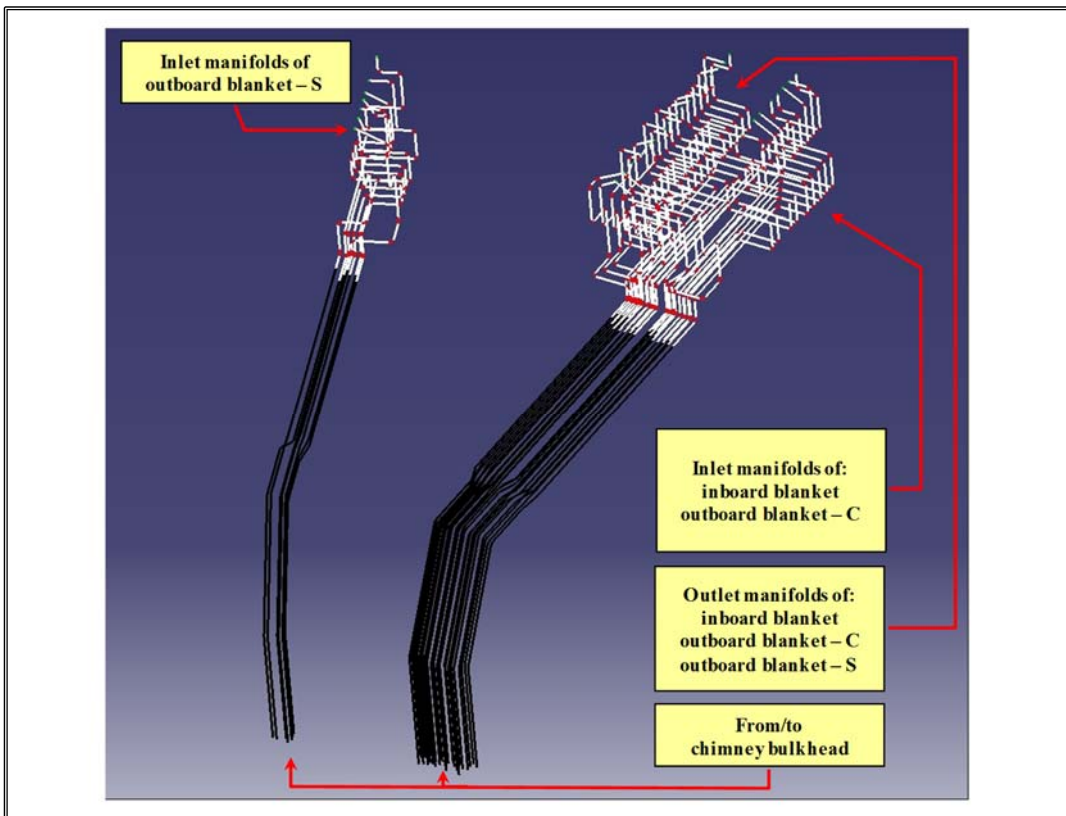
Blanket standard sector cooling system out-vessel manifolds.
